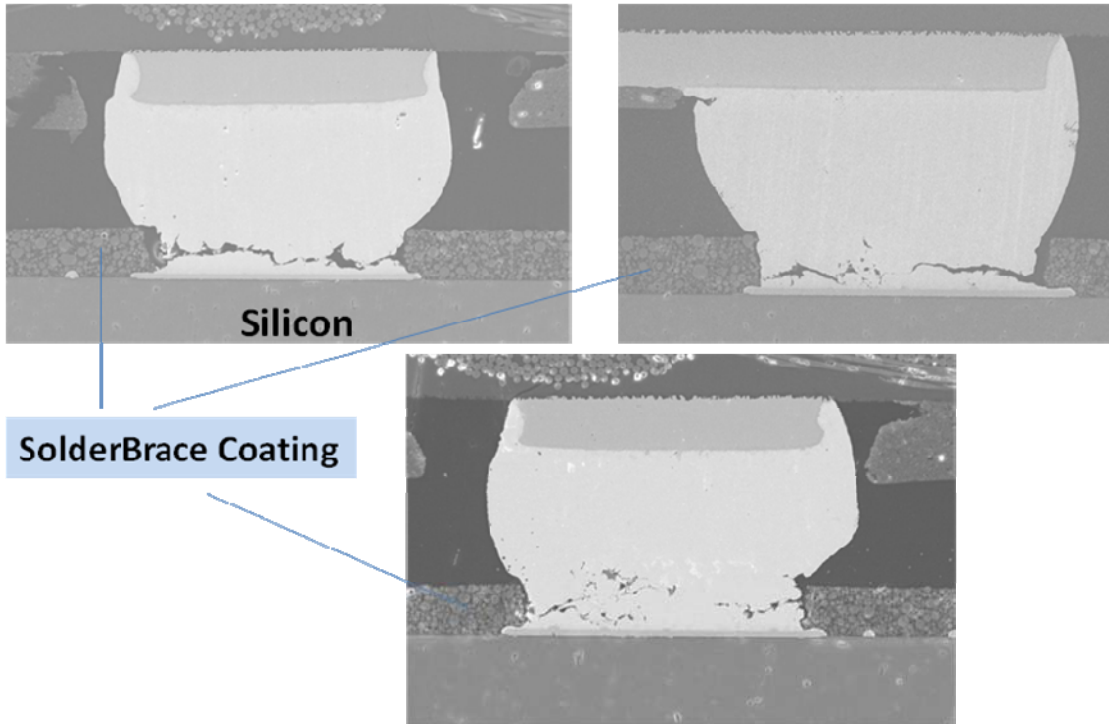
Cross Section of SolderBrace coated dies with cracks in the solder near the pad surface
